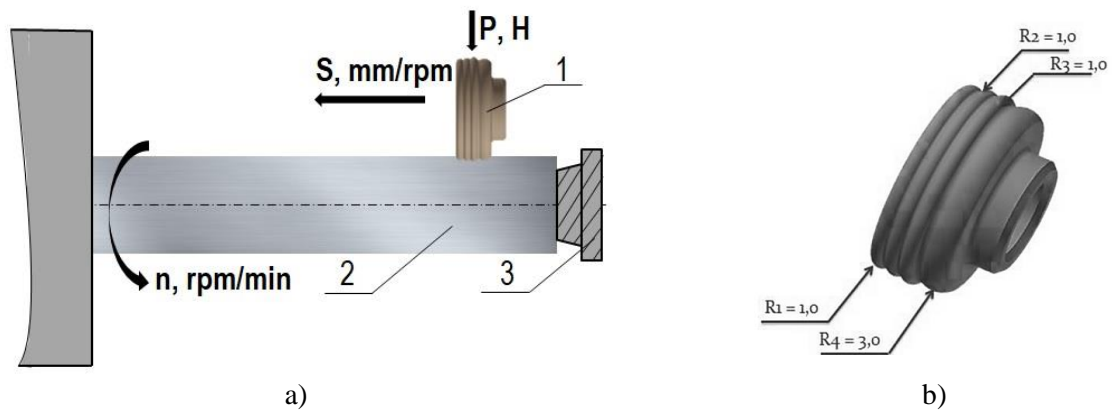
Scheme SPD by MR-roller: a) Scheme of the machining process on a numerical control lathe (NCL), 1 – MR-roller, 2 – work piece, 3 – pressure center; b) General view of the working part MR-roller
